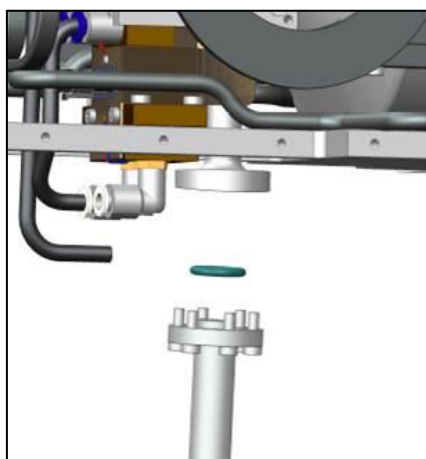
Connect the top end of the flex-hose assembly to the jet exit port using a 14x3 mm Viton O-ring and six M4x12 screws. Be careful not to scratch the sealing surfaces during assembly.
